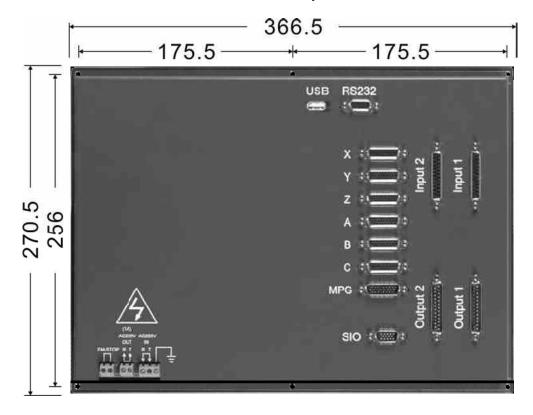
H4D-M Cabinet Dimensions and Rear View port
